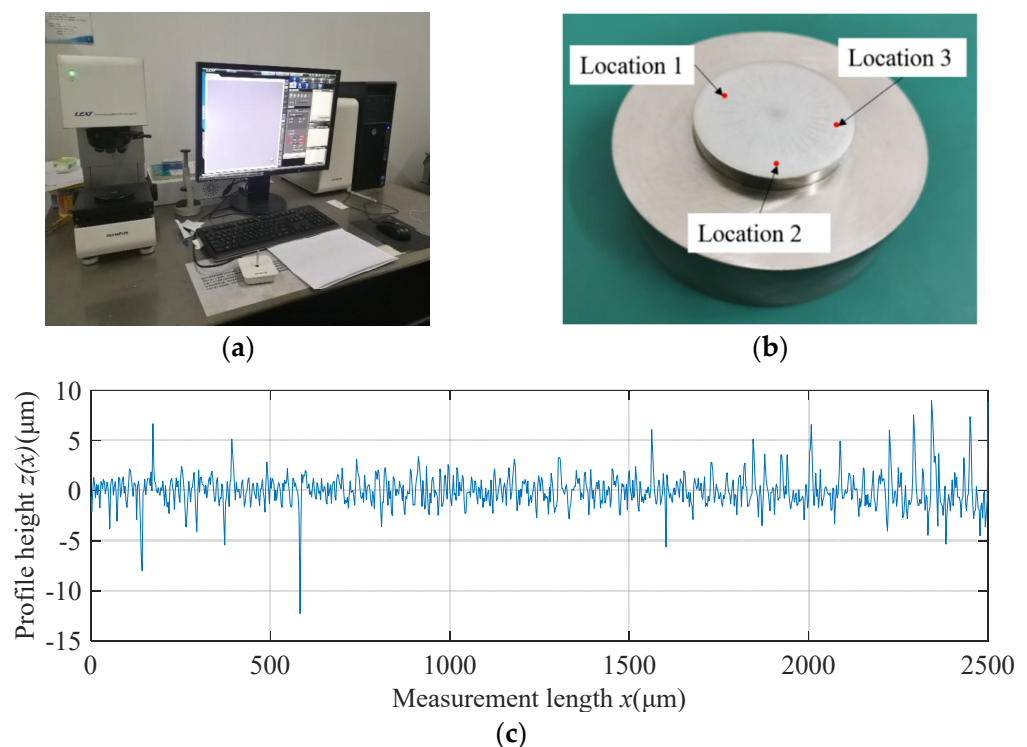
The measurement instrument and the measuring surface topography: (a) sealing surface measuring instrument (OLYMPUS OLS4100); (b) test specimen and measuring locations; (c) original profile of the sealing surface.
